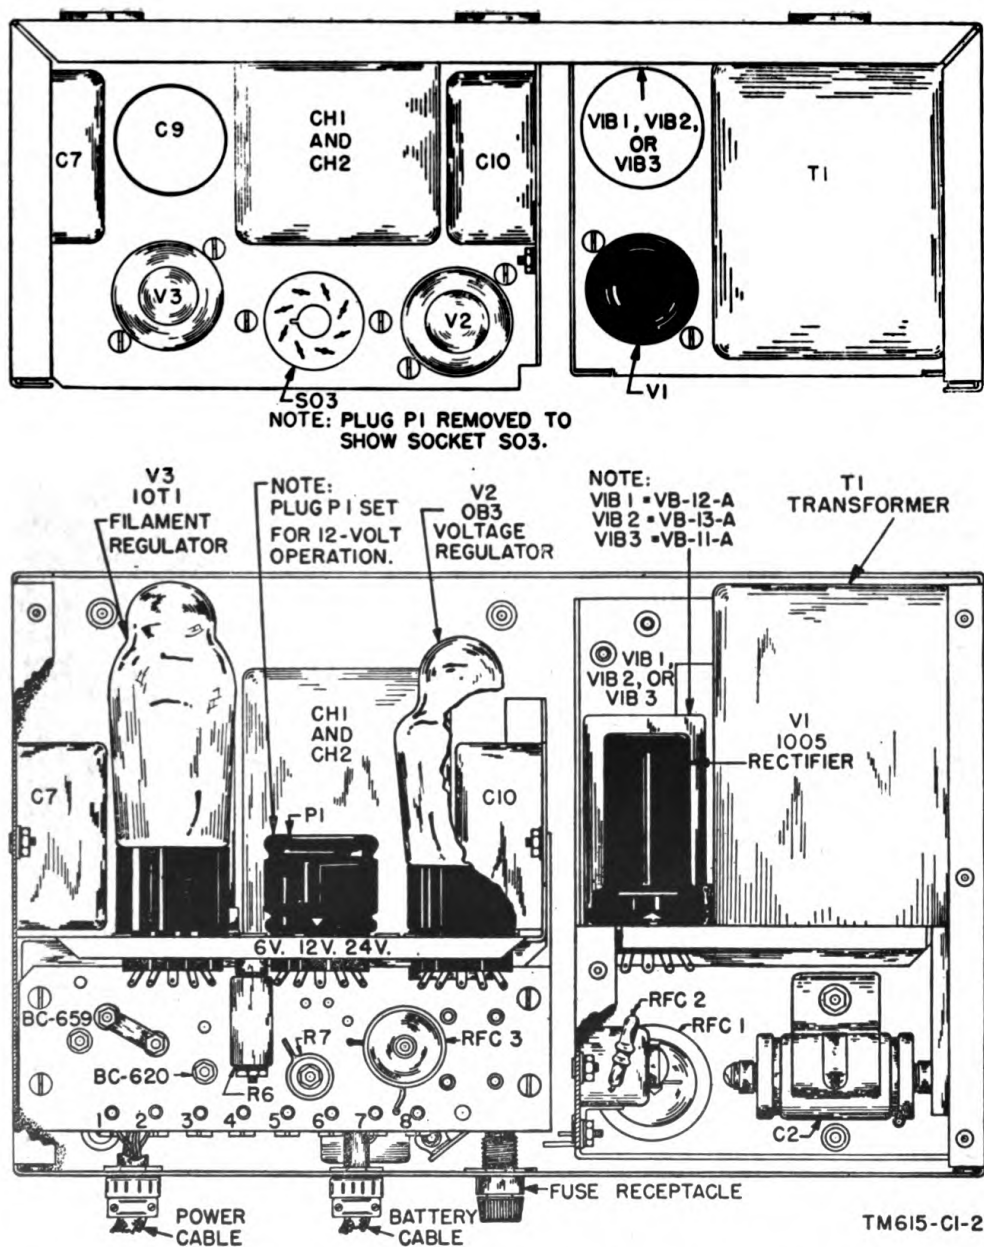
(Added) Power Supply Unit PE-120-C, side and top views with cover removed.
